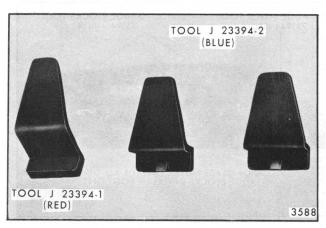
Glass Alignment Gauge Blocks - Tool J-23394 or Equivalent (Set of Three Blocks) - "F" Styles
